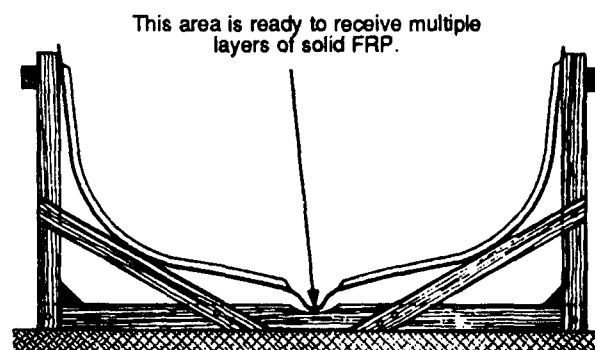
Simple, Wood Frame Male Plug used in Sandwich Construction [Johannsen, *One-Off Airex Fiberglass Sandwich Construction*]
